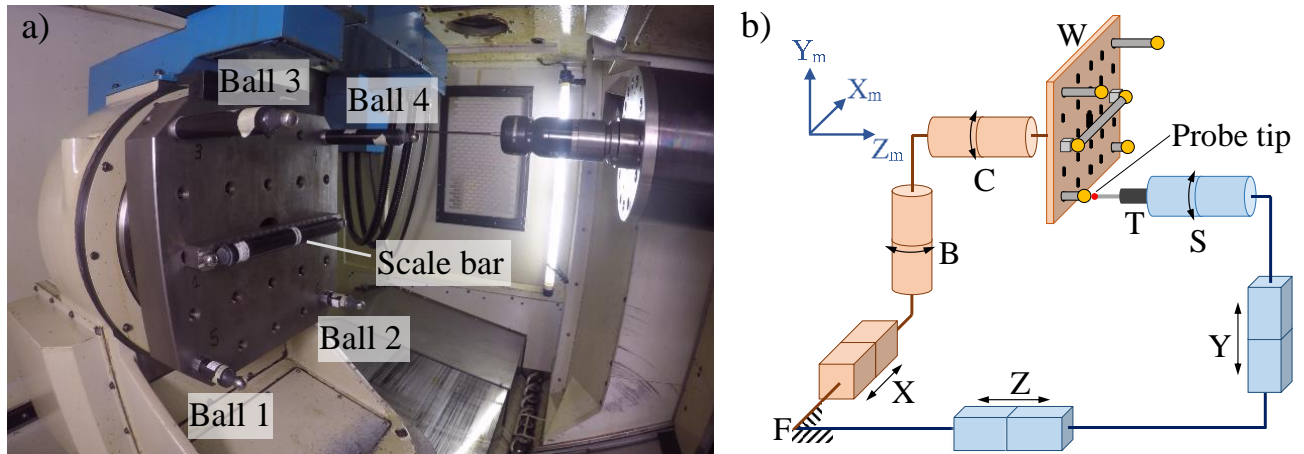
a) Experimental setup of SAMBA on a Mitsui Seiki HU40-T machine tool equipped with a Renishaw® MP 700 touch-trigger probe. b) Schematic of the five-axis machine tool with topology WCBXFZYST (W: workpiece; C and B: rotary axes around axes Z and Y, respectively; X, Y, and Z: machine linear axes; F: foundation; S: spindle, and T: tool).
